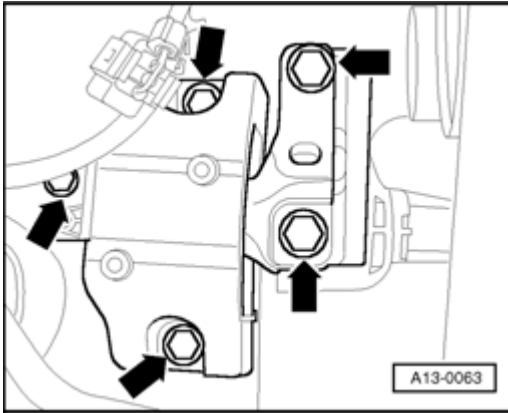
Unbolting Engine Support From Engine Console And Engine Console From Body
